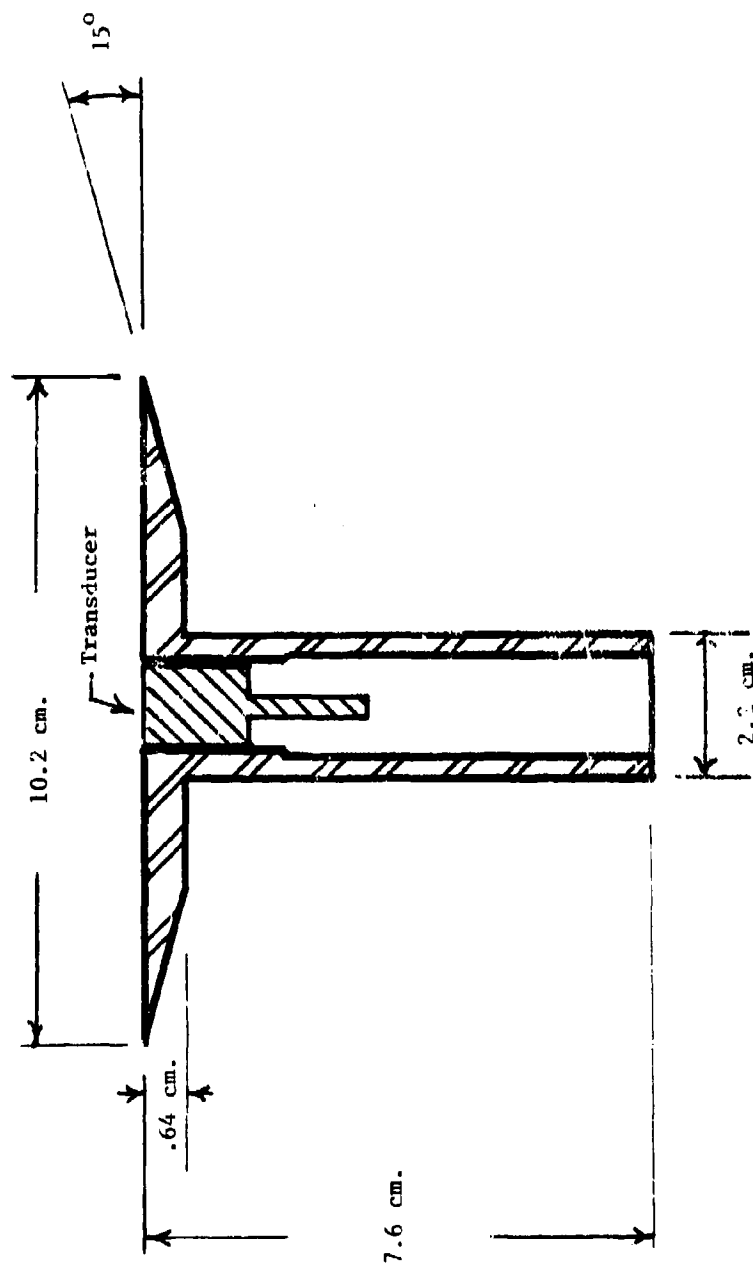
Dimensions of the skimmer plate designed by George Coulmer of the USABRL.
